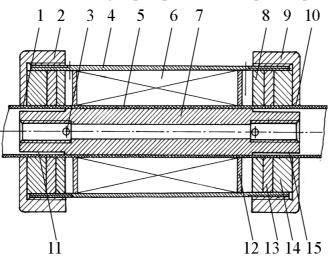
Device for water magnetization: 1 – pipeline from molded polyamide; 2 – magnetizing coil; 3 – core; 4 – body; 5 – end caps; 6 – pole lugs; 7 – radial holes for supplying water to the treatment area; 8, 9, 10 – ferromagnetic rings; 11 – core steps; 12 – coil cheek
